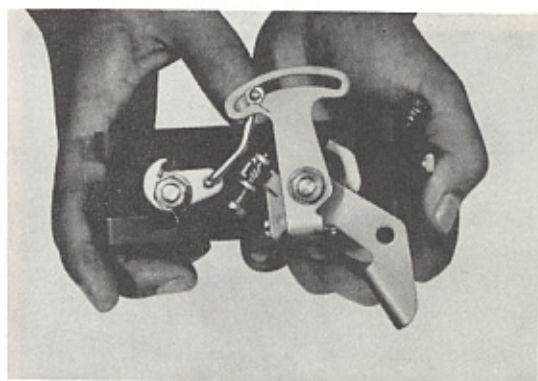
Primary Throttle Shaft Arm Removal V0799
